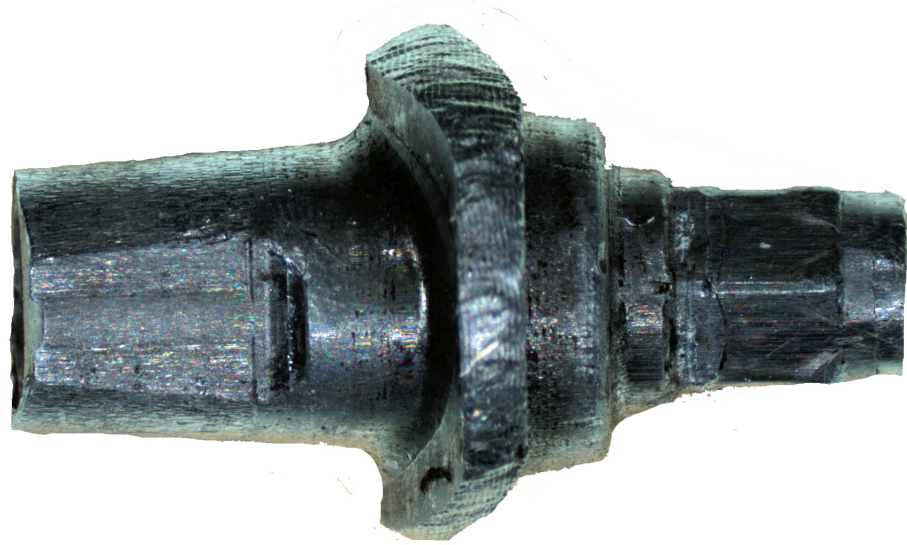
Component formed after alignment of the upper and lower forming die. The component length is short measured and the material is flashed out at the skirt prematurely.
